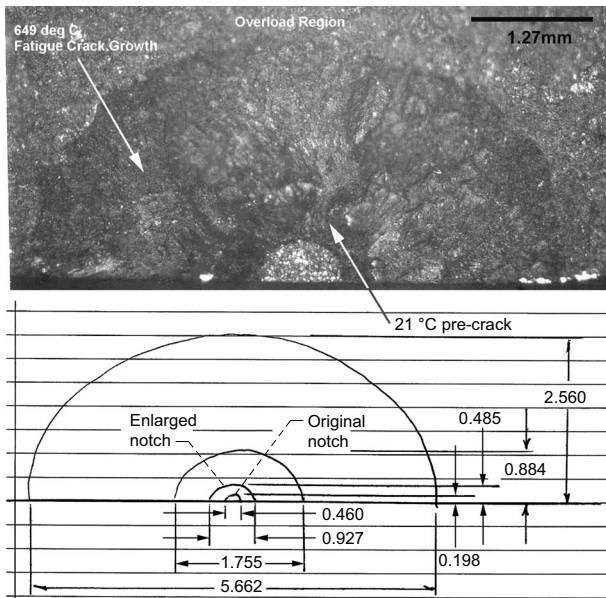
Fracture surface measurements for the GXMM247 ( $K_6$  specimen 32K). Dimensions are in millimeters.
